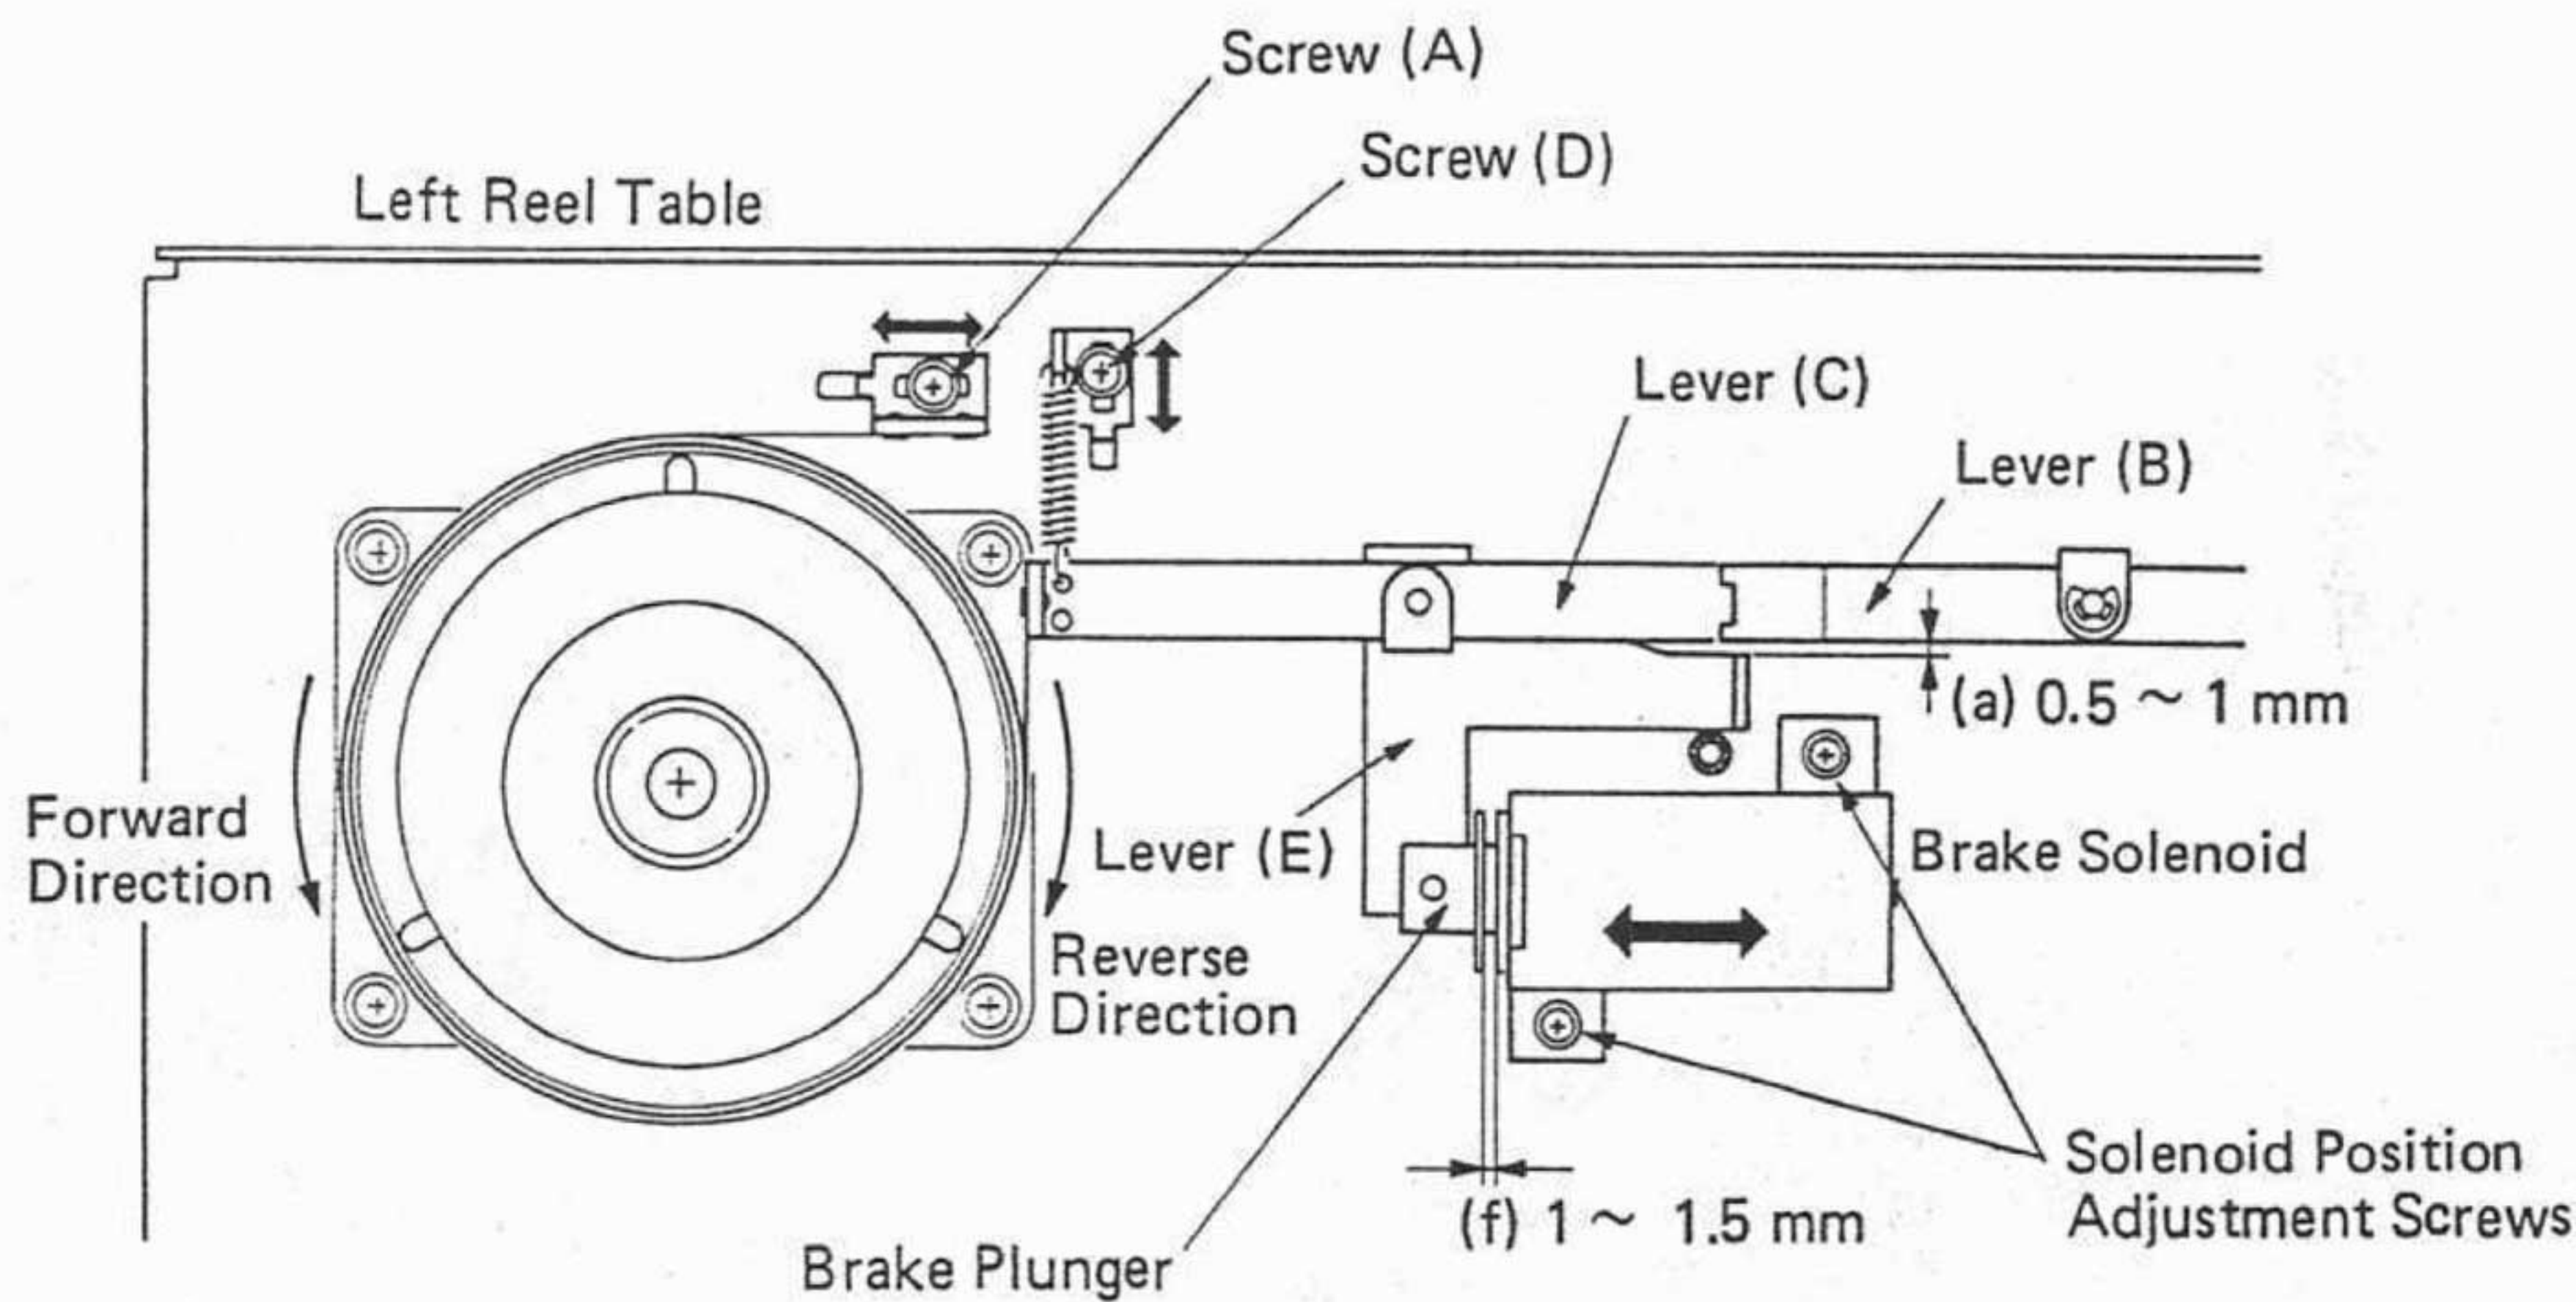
BRAKE MECHANISM & TORQUE ADJUSTMENTS
